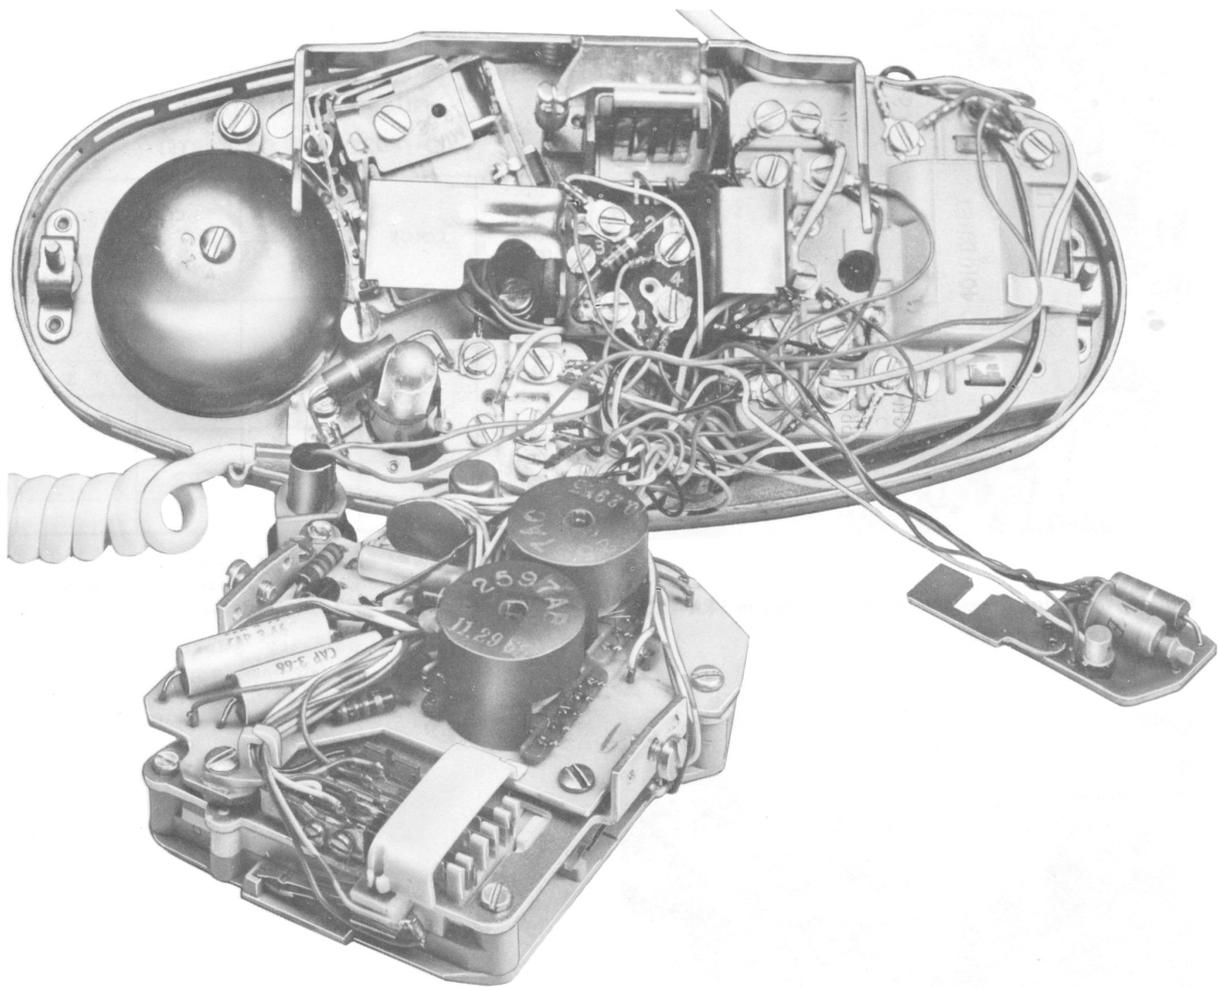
P-21F675 Terminal Board Installed in 1702D (MD) Telephone Set
